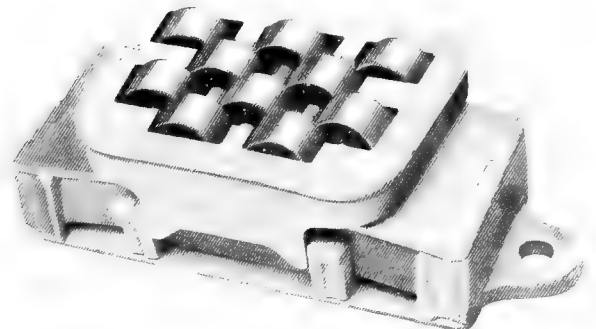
Creco Roller Side Bearing No. 7-A for Six-Wheel Passenger Train Car Trucks.
